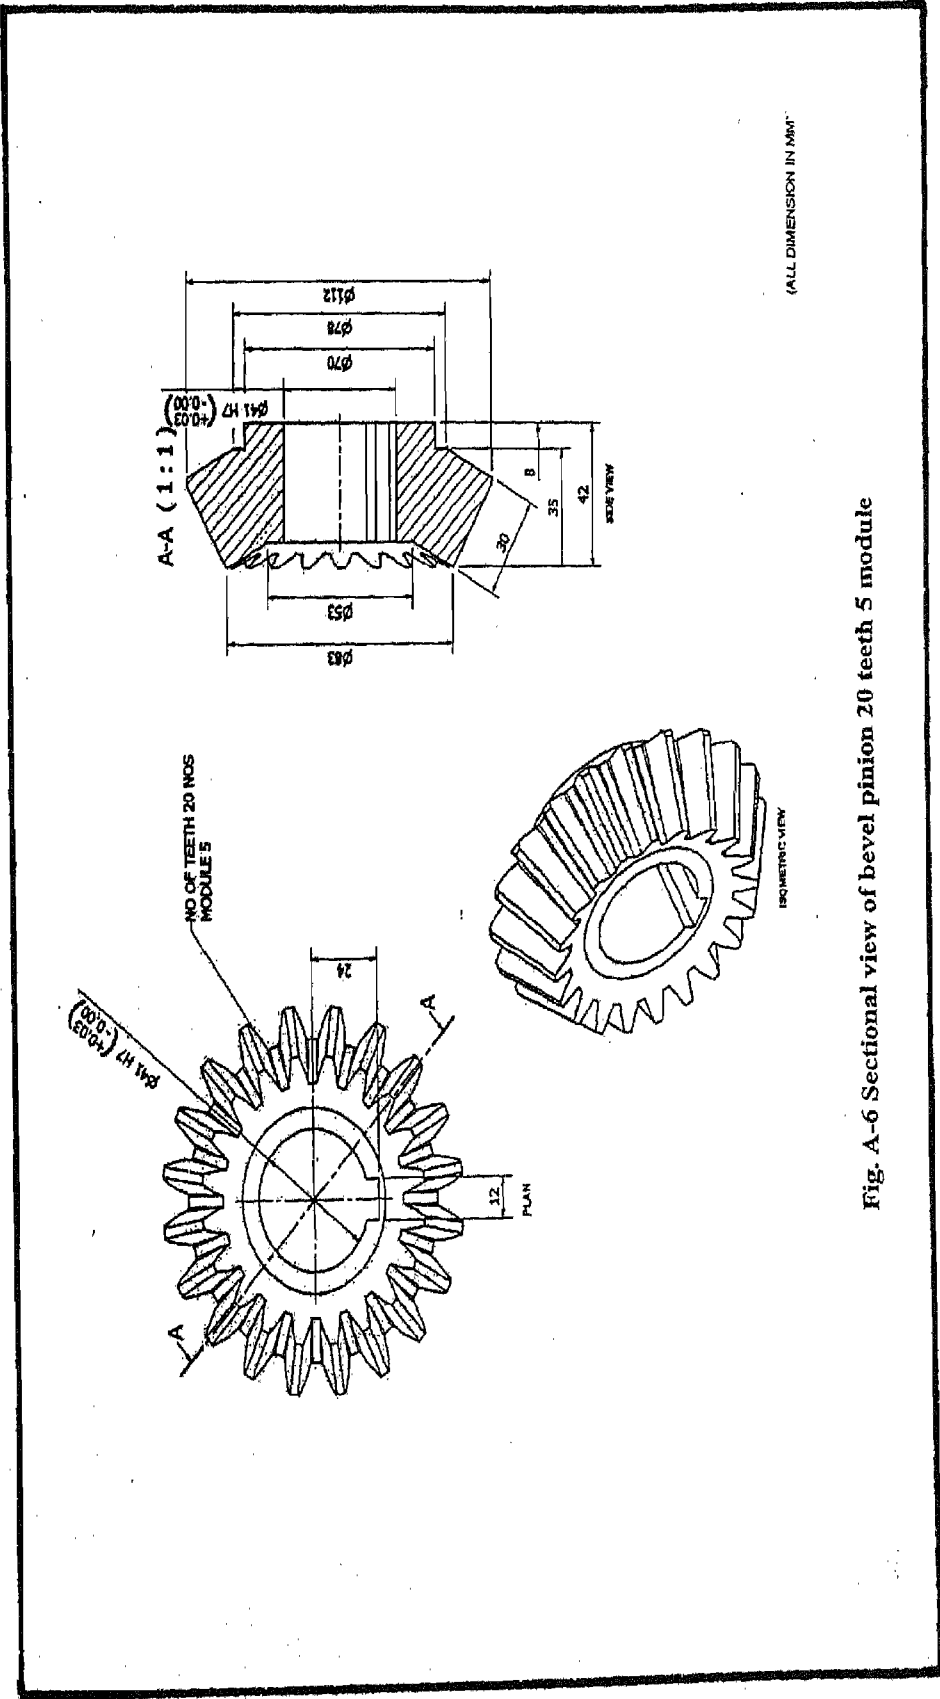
Sectional view of bevel pinion 20 teeth 5 module
